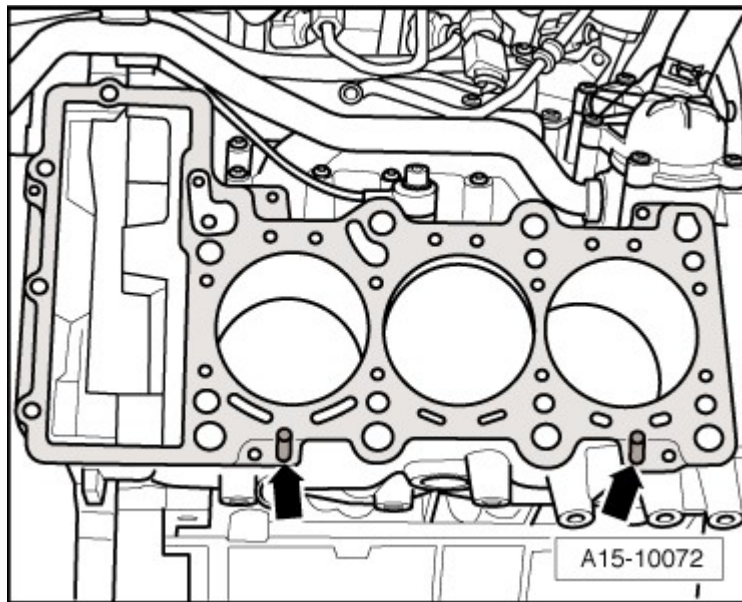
Identifying Alignment Bushings In Cylinder Block -Arrows-
